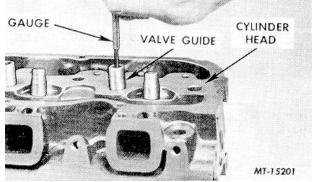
Checking Valve Guide Bore Using Gauge SE-1826
